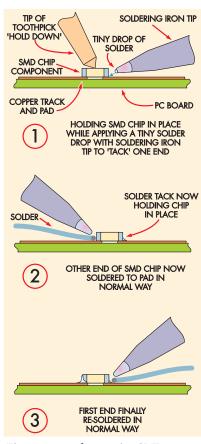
0805 and 1206 size SMD chips can be soldered into position with the aid of a toothpick (to hold the device in position) and a soldering iron with a fine tip. It really helps if your PC board has the copper pads solder-plated, as this makes it much easier to fit the SMD parts.
